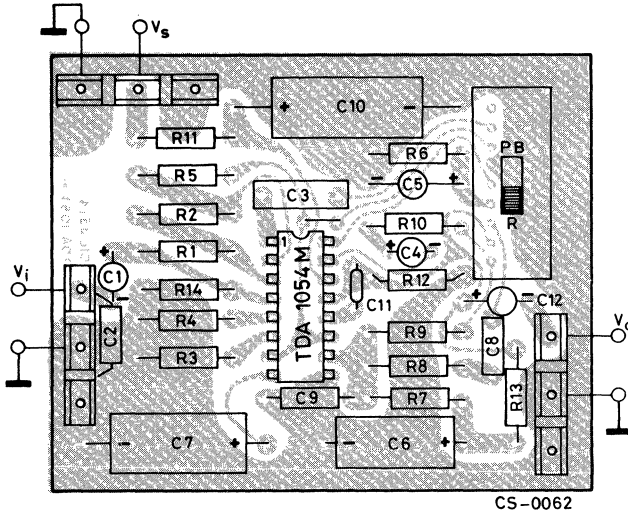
P.C. board and component layout for the circuit in fig. 18 (1:1 scale)
